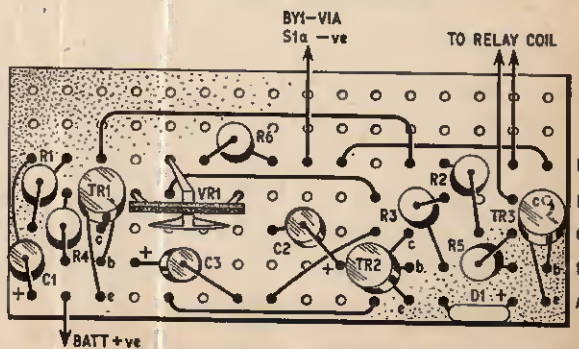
Components to the left of the dotted line shown in Fig. 1 are assembled on this Veroboard
